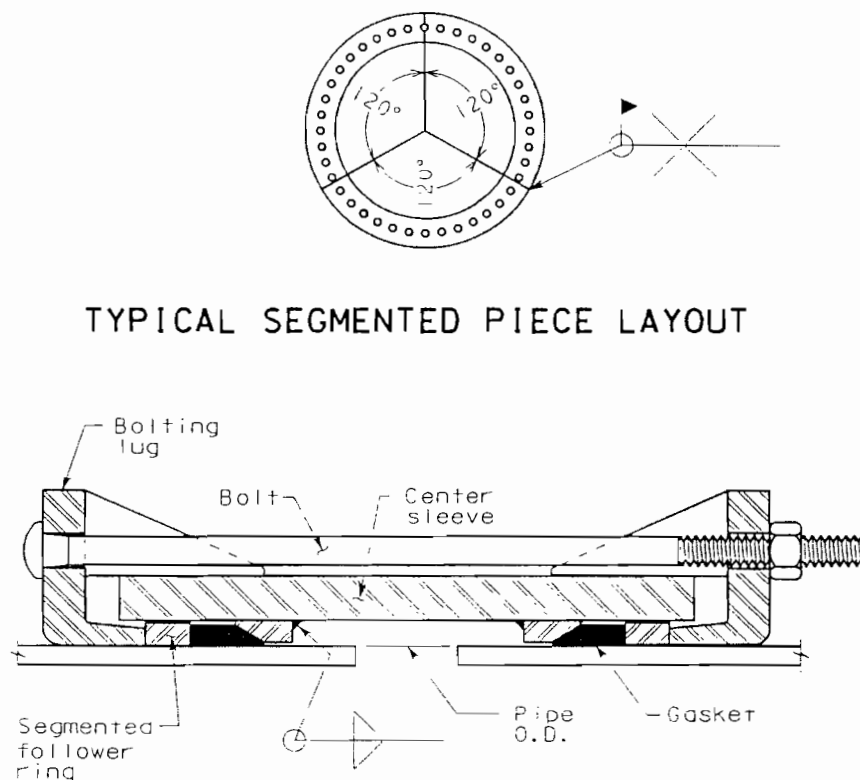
Segmented Bolted Sleeve-Type Coupling
